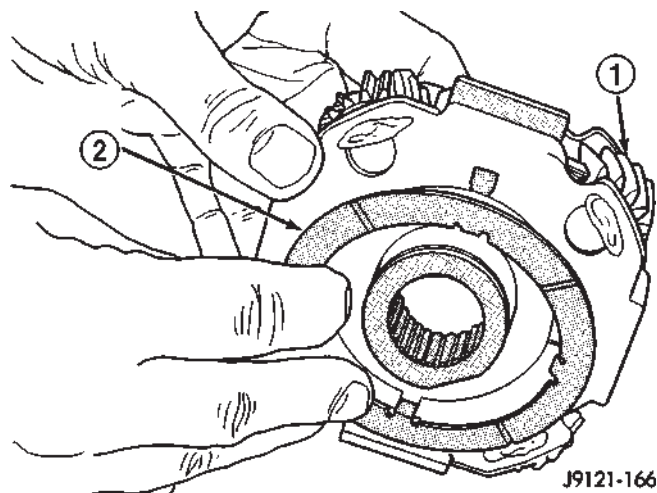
Installing Rear Thrust Washer On Front Planetary Gear
